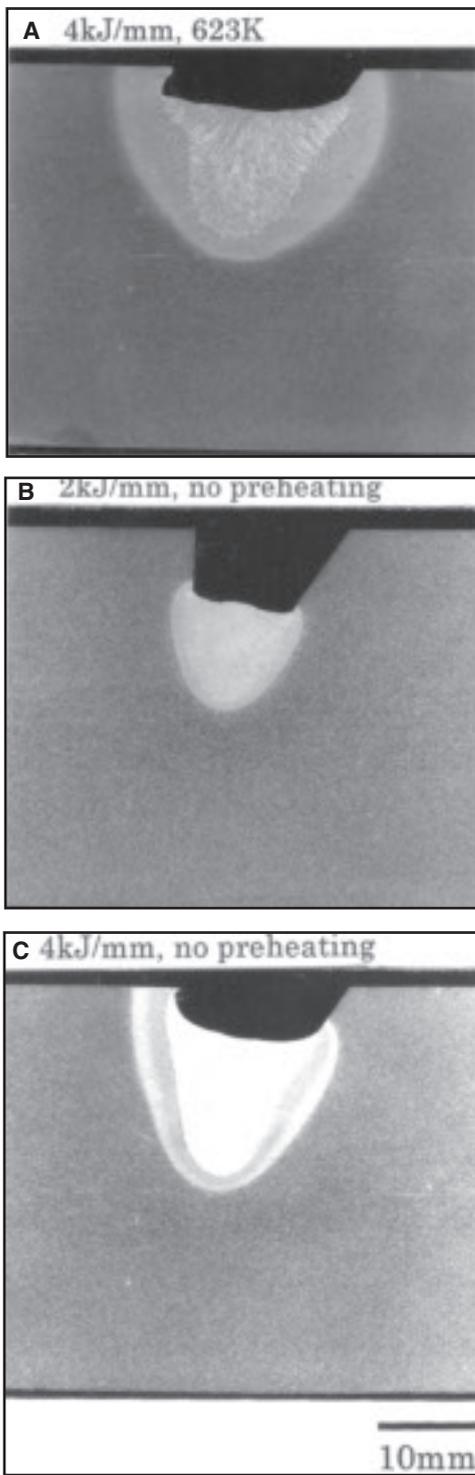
Macrostructures of the single-layer weld joints.
